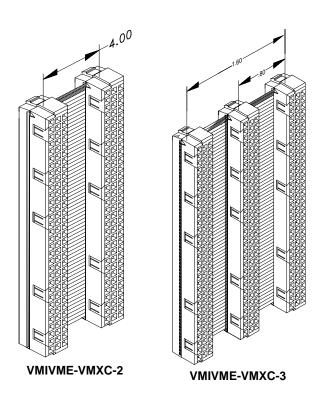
64-Conductor Cable Assembly (Model No. VMIVME-VMXC-2 and VMIVME-VMXC-3)
